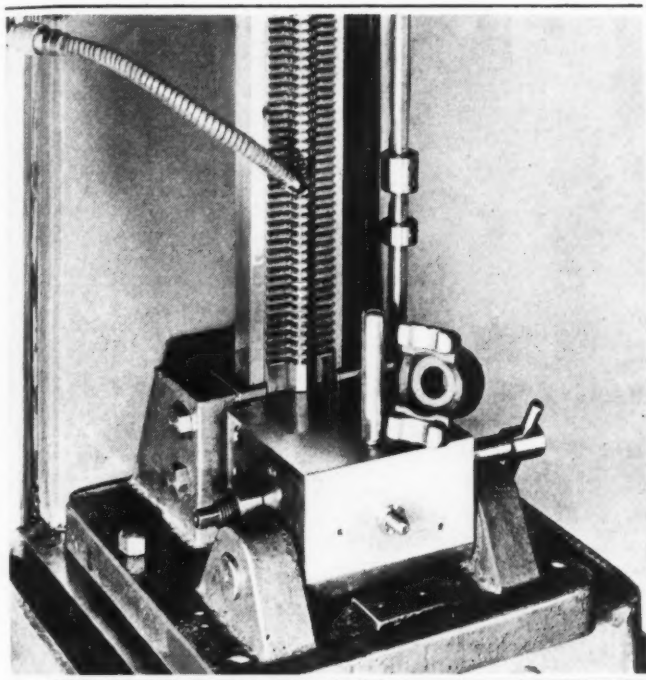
An Operation in which the Broach is Simply Guided by the Fixture
